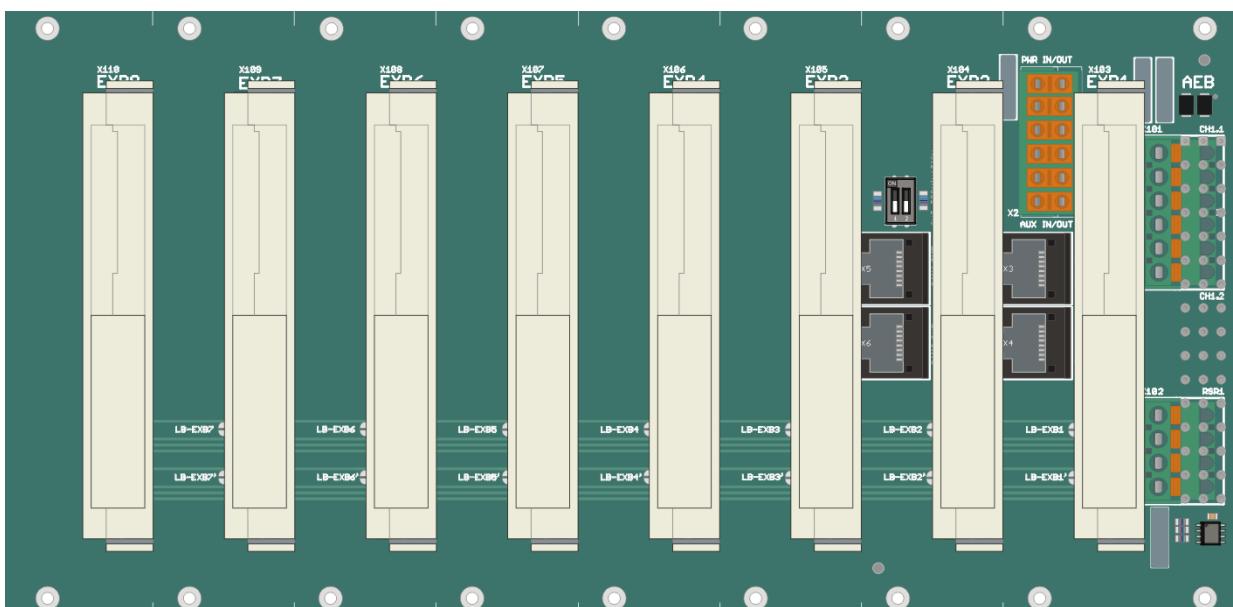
Rear side of the BP-EXB101-8, with cable housings and cage clamp terminals
